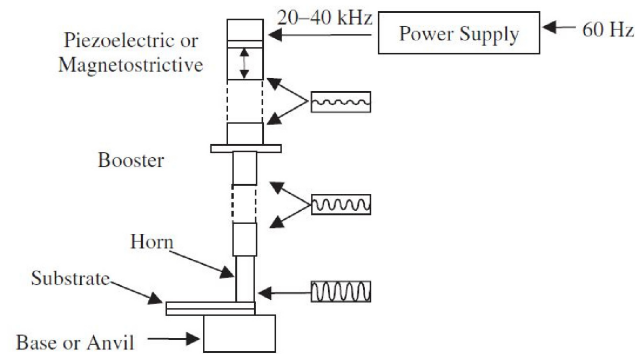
Basic schematic of an ultrasonic welding machine [30]
